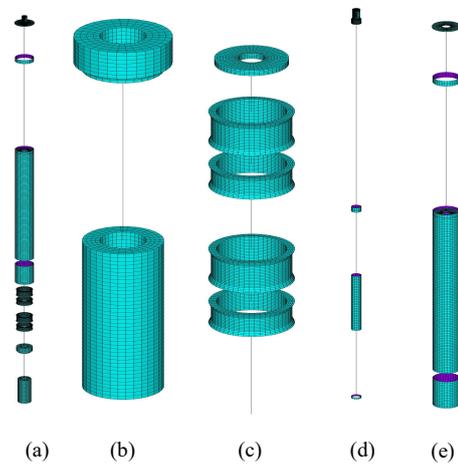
Hybrid FE model of the CEDM: (a) CEDM, (b) nozzle, (c) motor housing, (d) upper pressure housing, (e) upper shroud.
